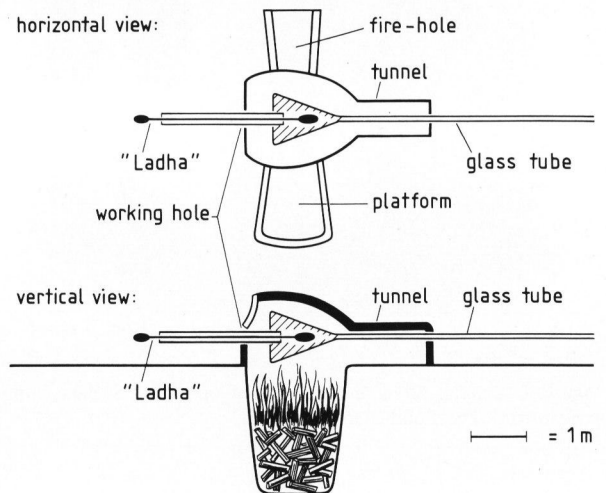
Plan of the furnace for drawing glass tubes; horizontal projection and longitudinal section, Papanaidupet.
